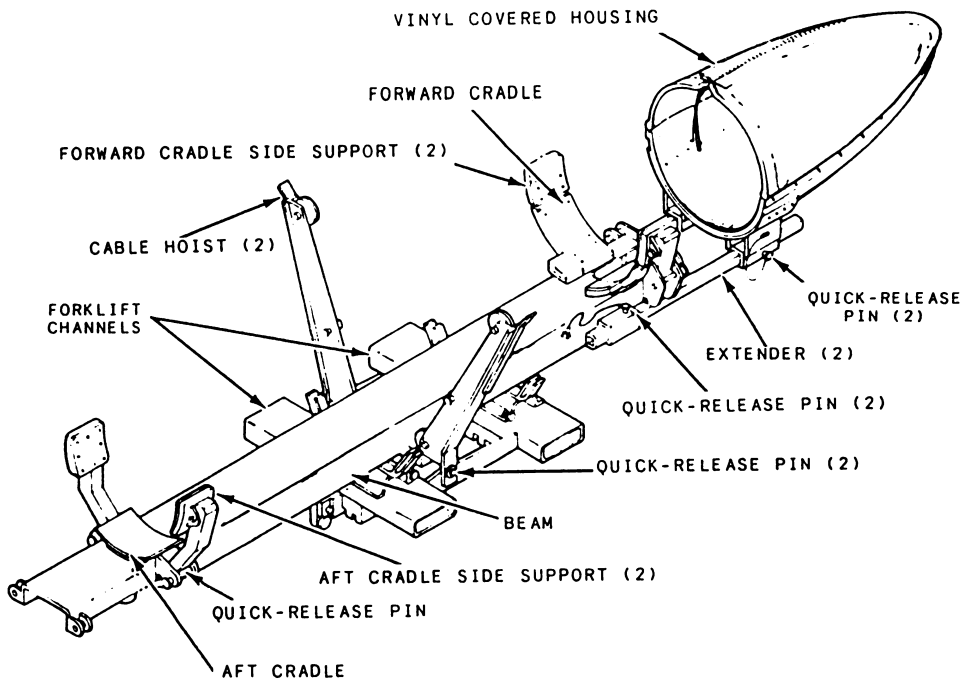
ADU-399/E guided missile hoisting beam.
